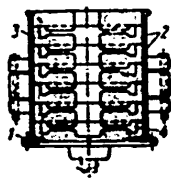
Scheme of Centrifugal Casting of Wheels; the Axis of Rotation Coincides with the Axis of Symmetry of the Casting; 1) Rotating Table; 2) Flask; 3) Sand Mold; 4) Cavity Forming Casting.
